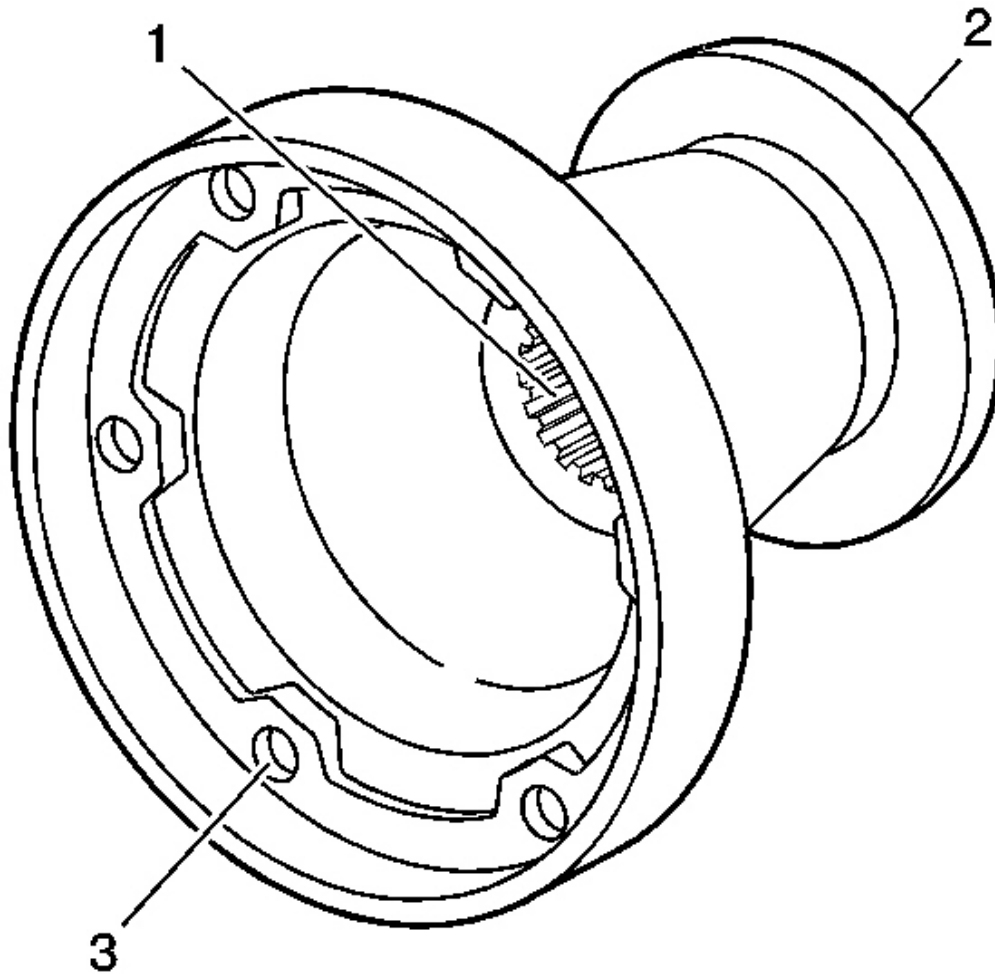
Inspecting Pinion Flange For Wear, Damage Bolt Threads & Worn or Damaged Splines
